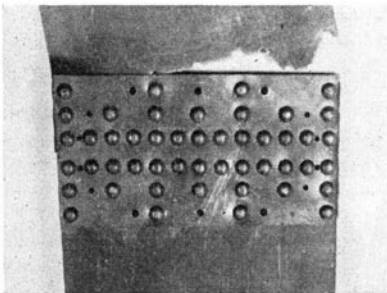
(LEFT). FAILURE BY SHEET TENSION ON A ZIGZAG SECTION, SPECIMEN ABA-34
